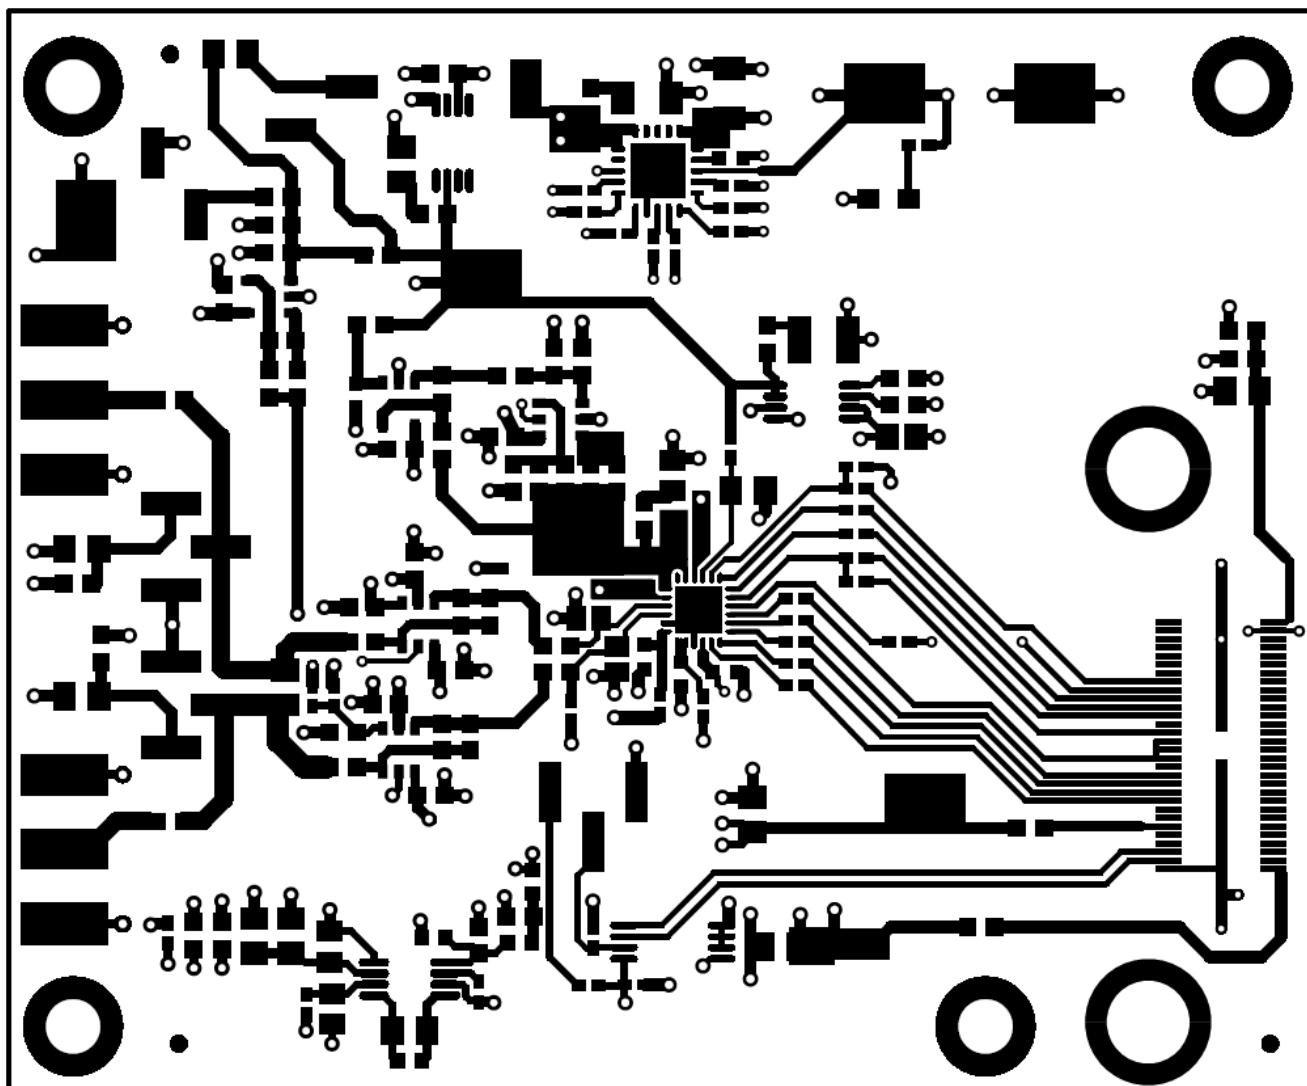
ADS9110EVM PCB Layer 1: Top Layer
